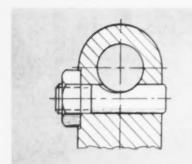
In this clamp, the bolt is circular notched to conform to diameter of part.
